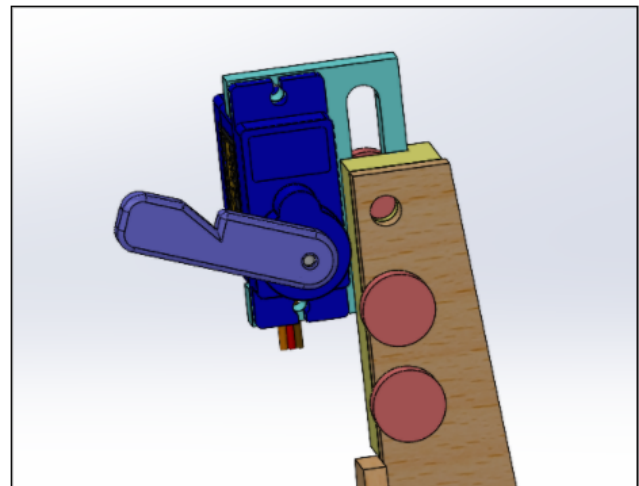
Side view of servo motor with custom horn that the sponge will be attached to.
